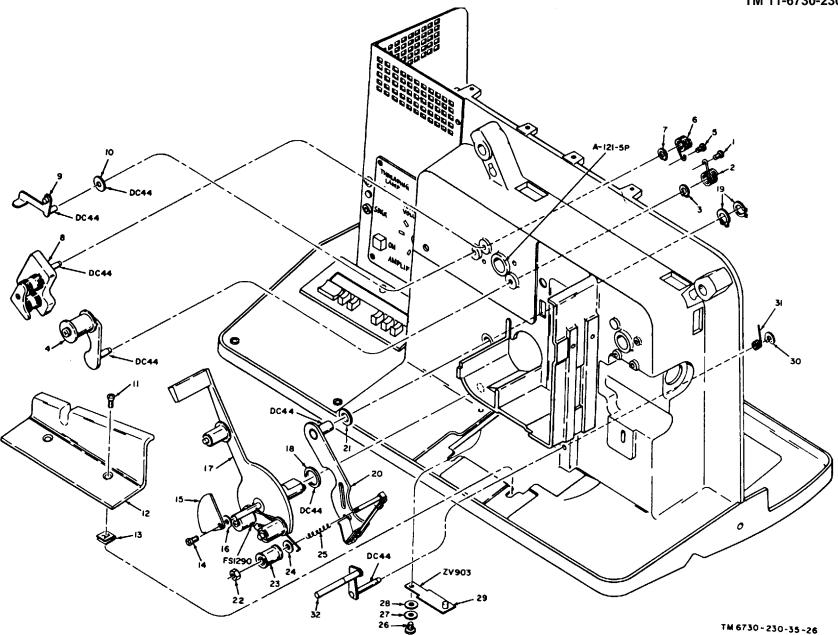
Threading control arm, pressure roller arm, and takeup shoe, exploded view.
